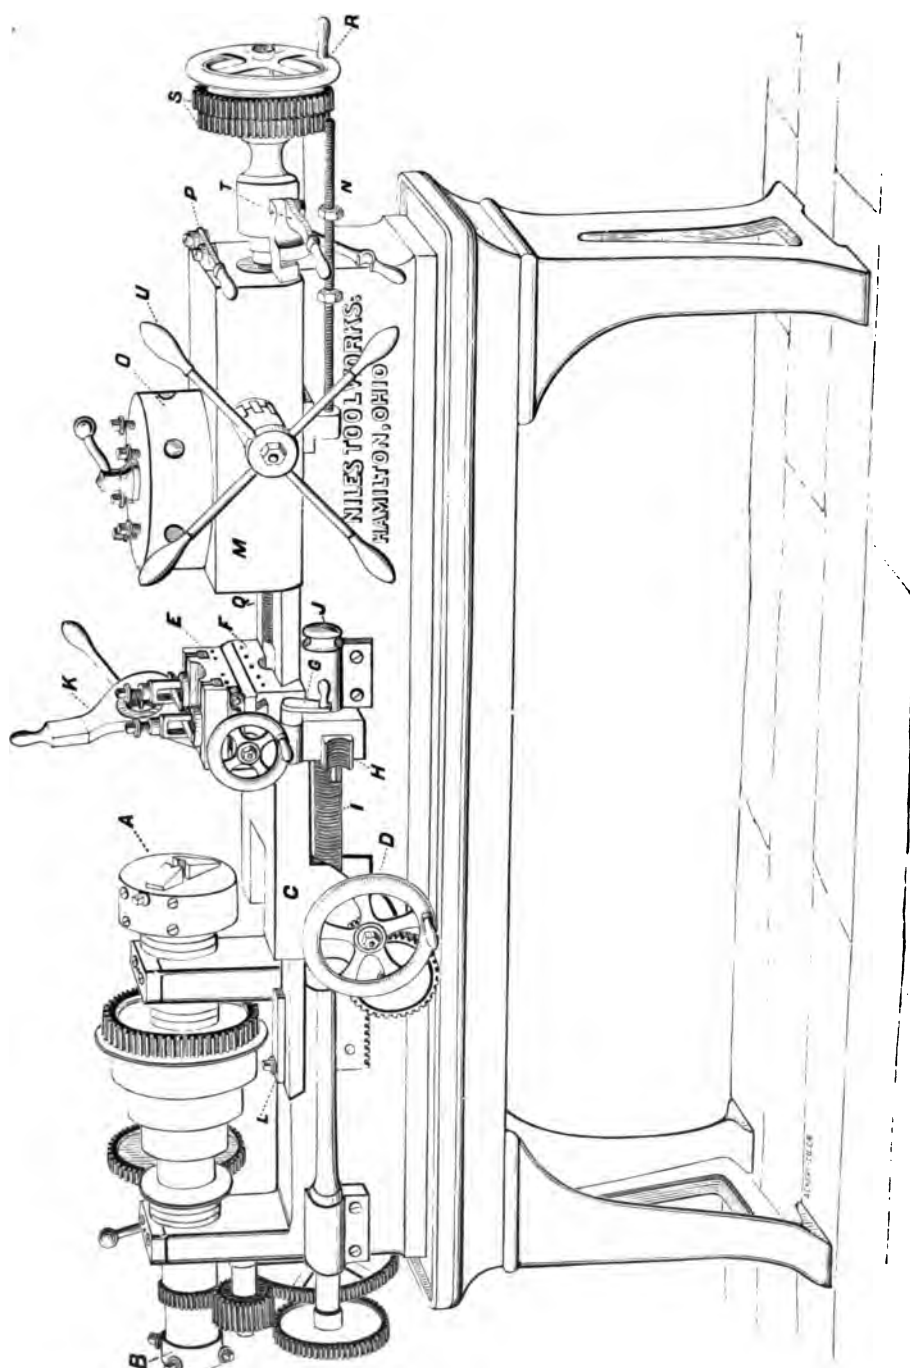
NO. 2 NILES SCREW MACHINE.
